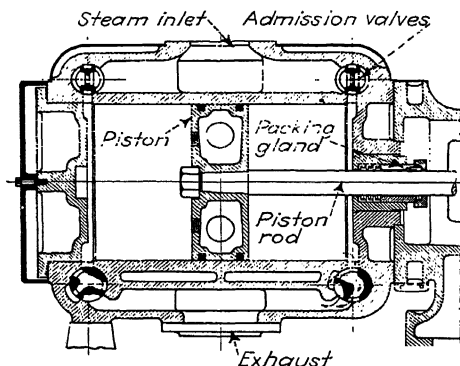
Section through a counterflow cylinder, showing Corliss-type valve.
